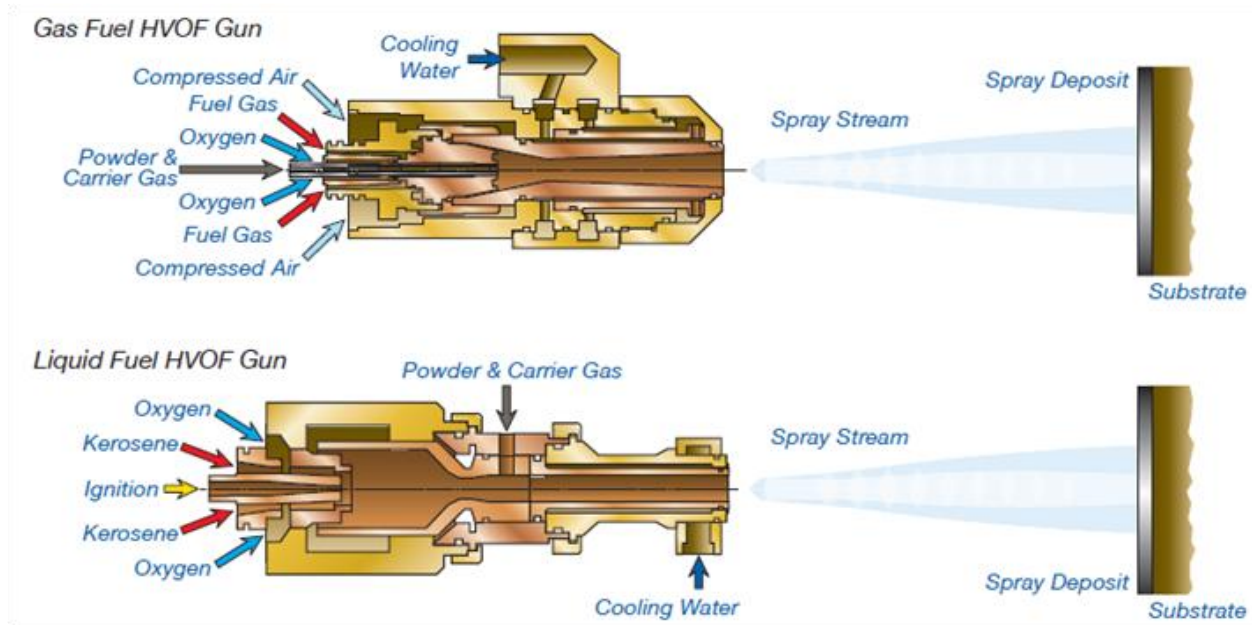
Both gas and liquid fuel HVOF gun drawings.
